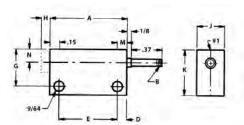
For strokes up to 1/2" Indicates port locations. The H dimension is for spring extend cylinders only.
